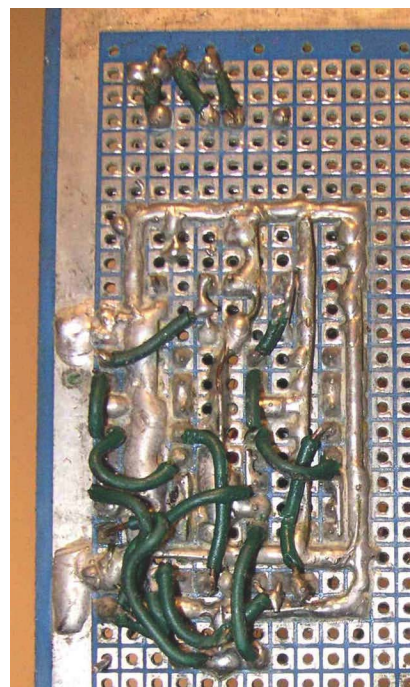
Soldering discrete wires to parts on a perforated board is an acceptable way of prototyping circuits.
